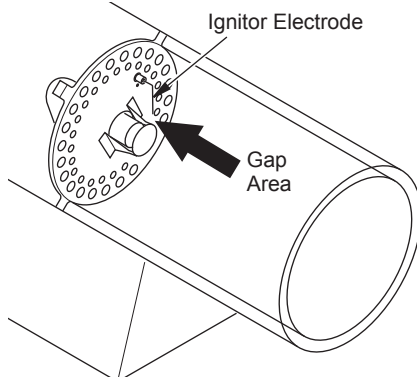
Clearance Between Ignitor Electrode and Target Plate
